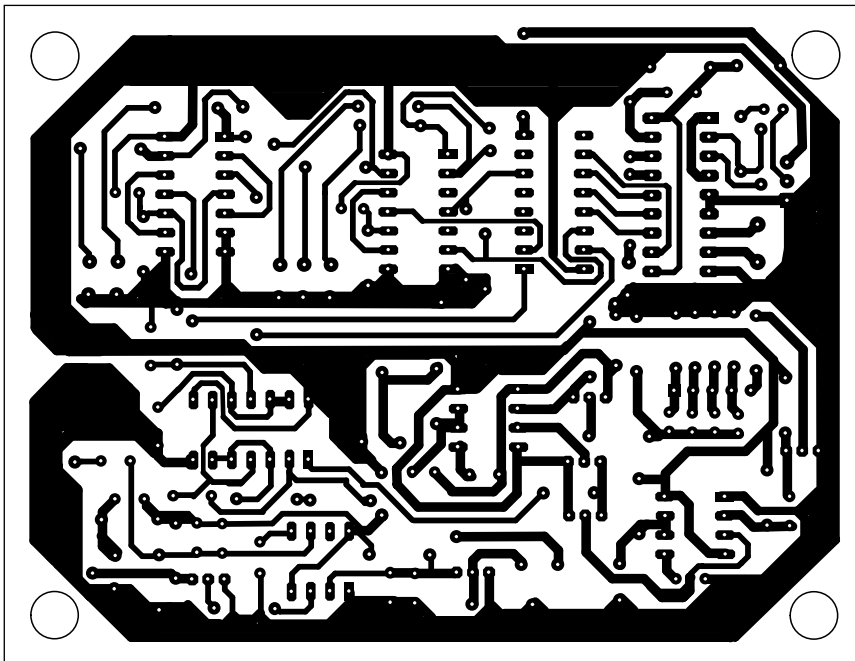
Actual-size, single-side PCB for Fig. 2 (PCB-2)
